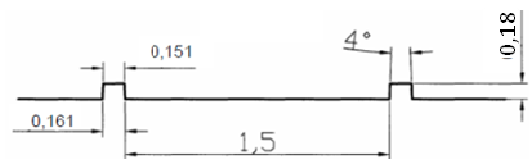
Technical drawing of second embossing tool; made of brass by BPE
